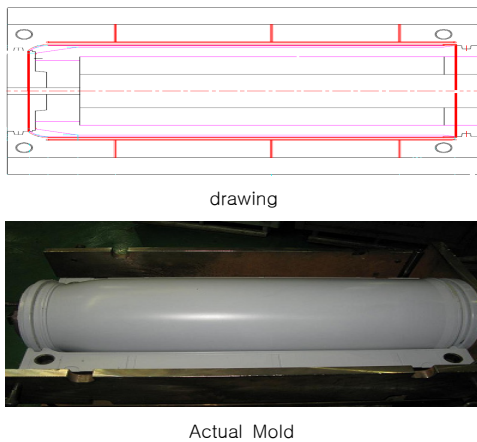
Designed and Manufactured Mold for Rear Insulator Tube
